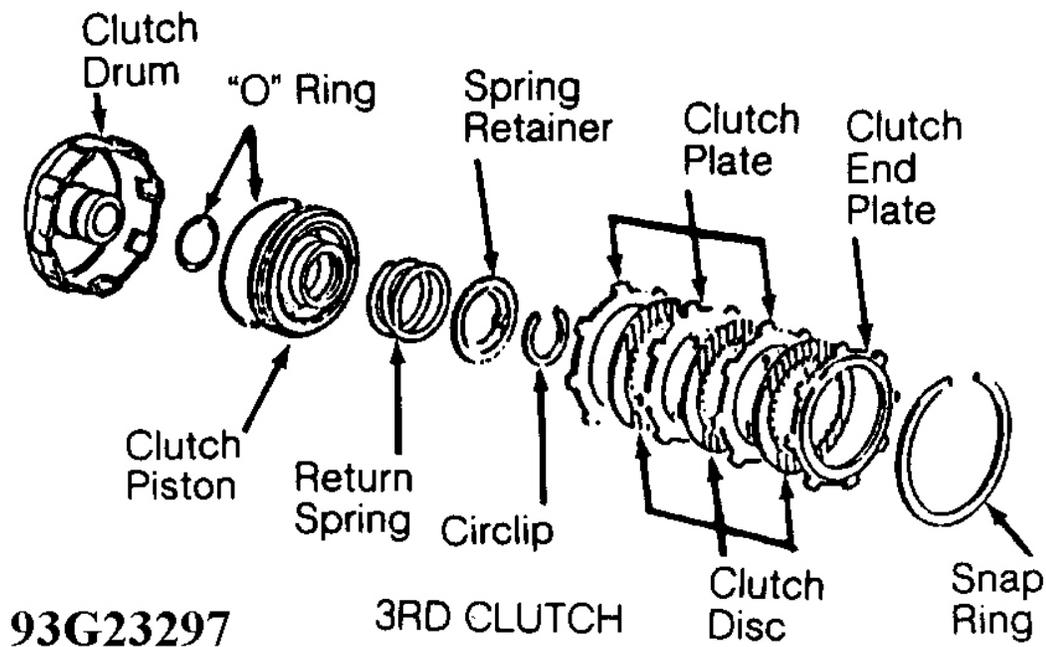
Exploded View Of Clutch Assemblies (2 of 3)
